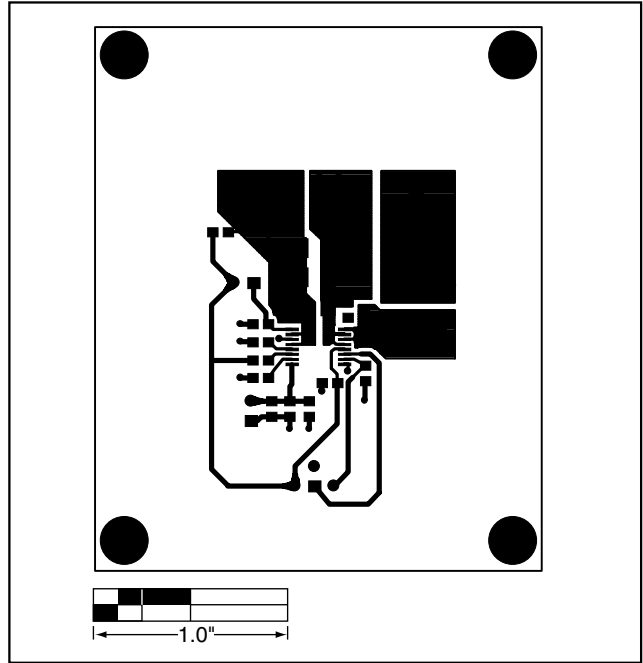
MAX1644 EV Kit PC Board Layout—Component Side
